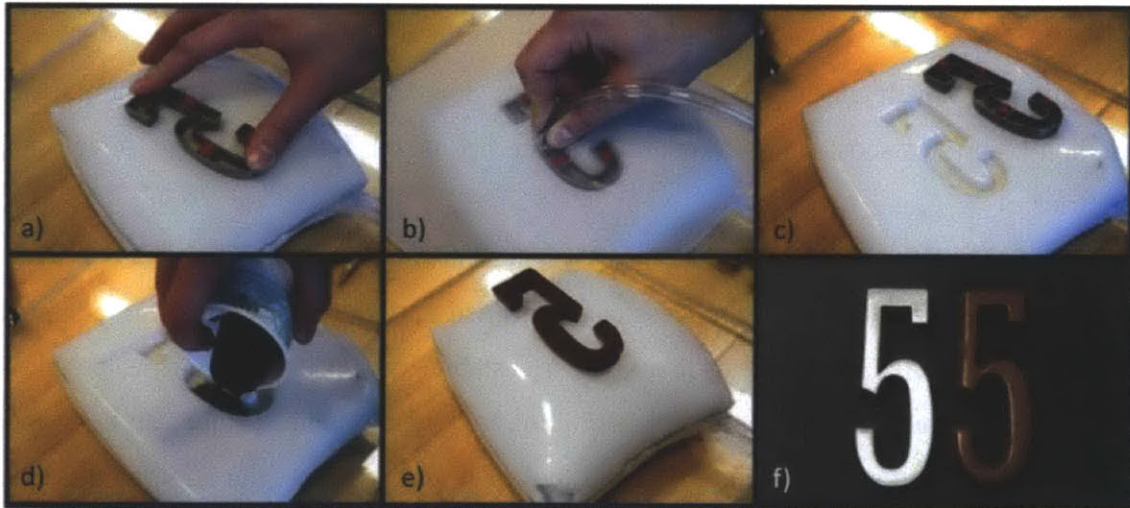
Casting using jammable materials involves depressing an object into the bladder (a), pulling a vacuum between the object and elastomeric bladder (b), pulling a vacuum inside the bladder to jam the granular media and make the mould (c), pouring a castable material into the mould, chocolate in this example (d), and using positive pressure to eject the casting (e). The final cast object is seen beside the original (f).
